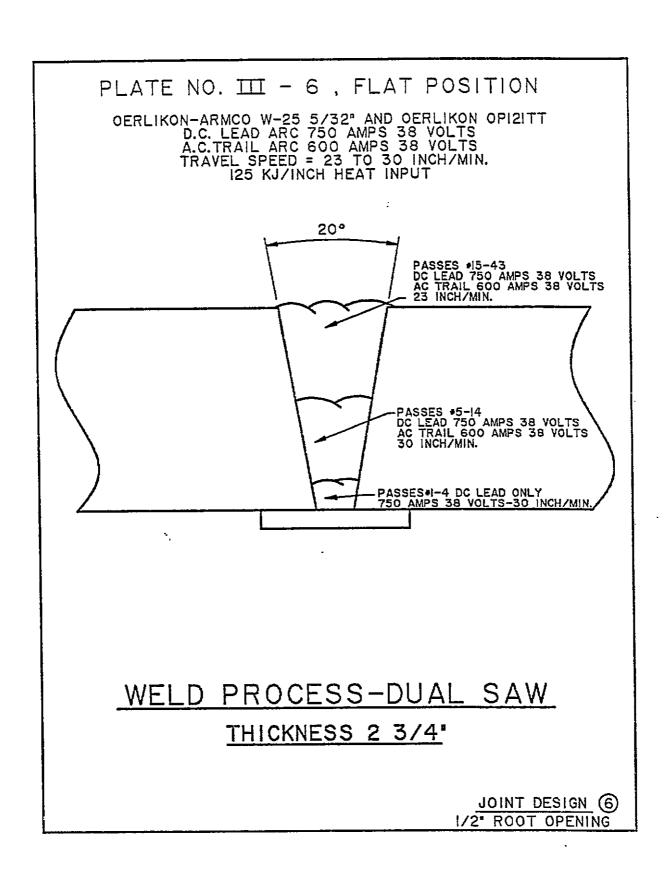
Weld Test Assembly for 2-3/4-Inch Thick 100 ksi Yield Strength Steel Plate
